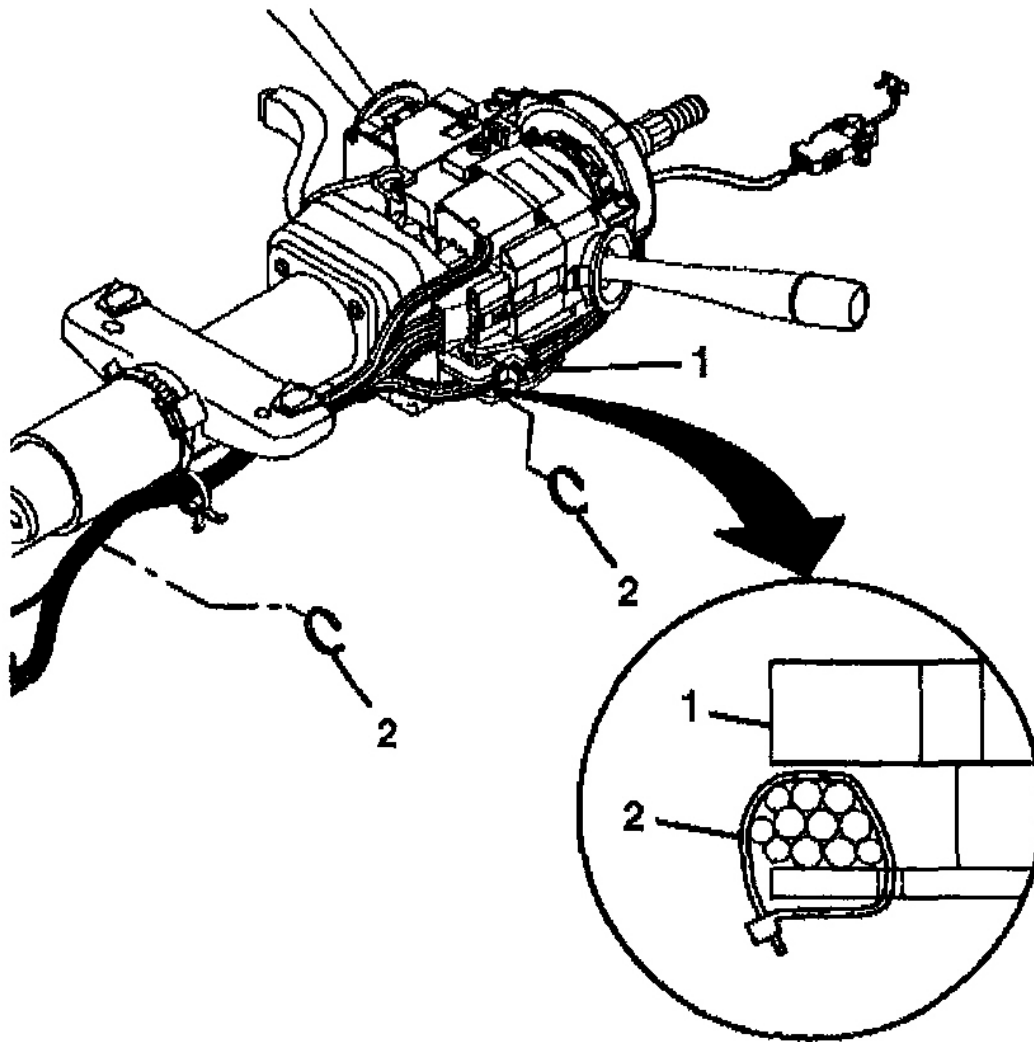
Removing Turn Signal & Multifunction Switch Assembly
